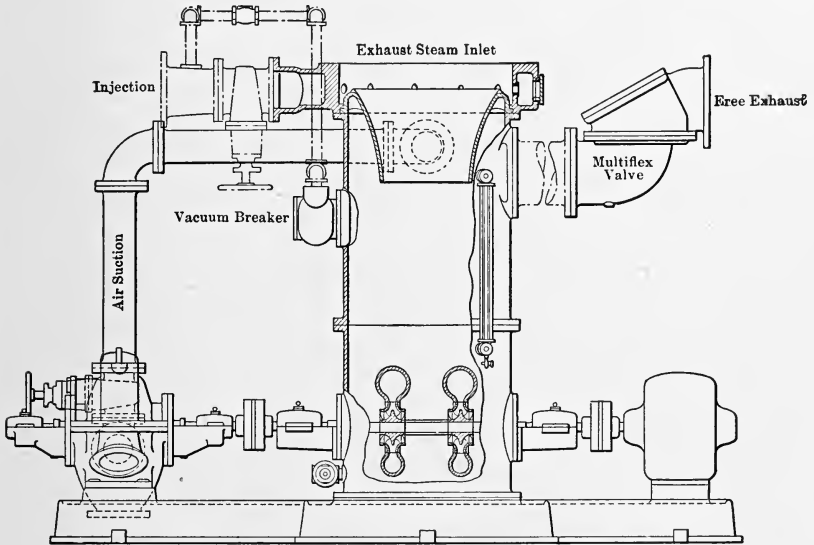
C. H. Wheeler Low-level, High-vacuum Jet Condenser.
